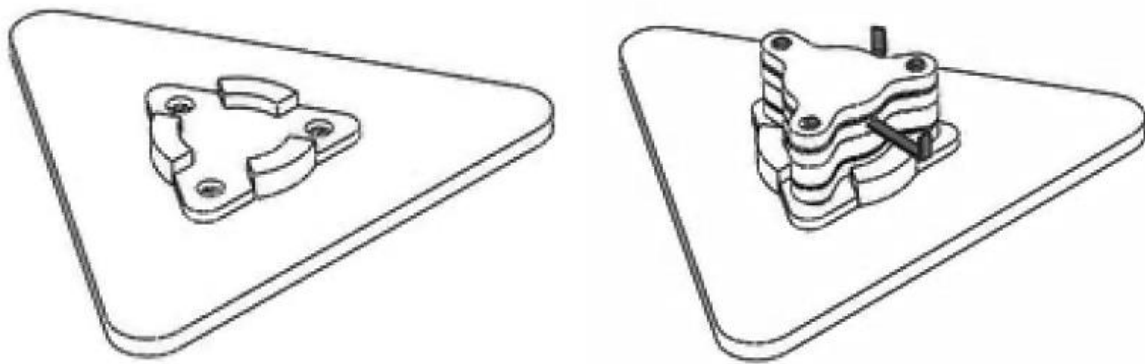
Assembly stand. On the left is a CAD model of the assembly stand and on the right is a CAD model of the third cell prototype being assembled with the stand. The stand was 3D-printed and used to ease the assembly process.
